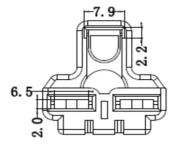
Engineering dimension drawing for alternative insert for KT101 (unit:mm)
